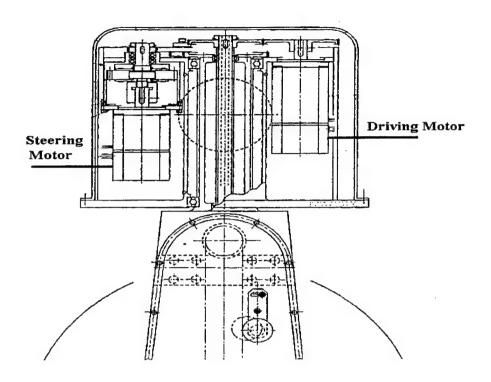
Side cut away of the motors and gears used in the Shepherd driving and steering mechanism (diagram not to scale).
